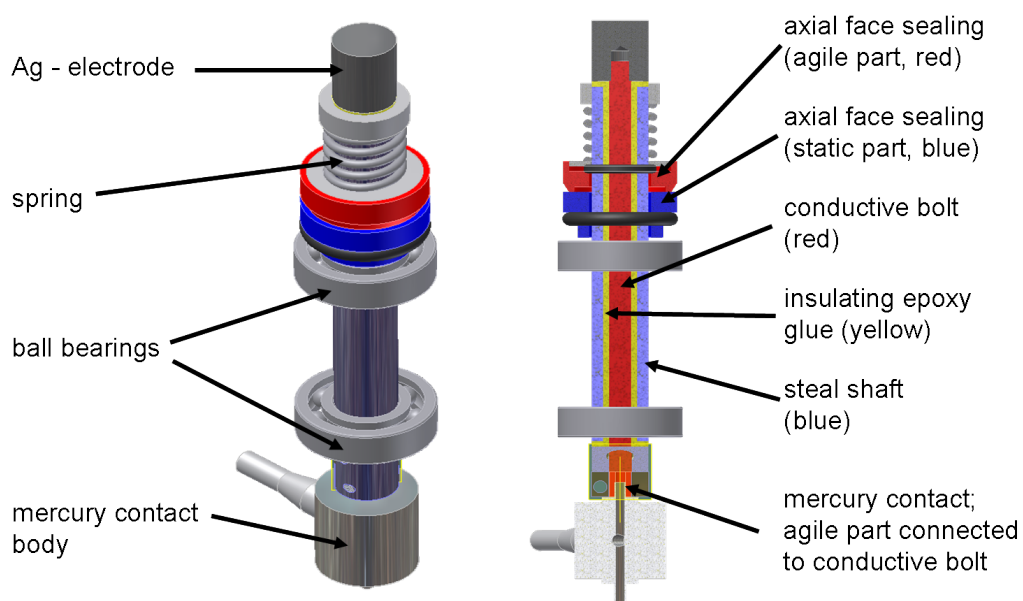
The drive shaft was the most challenging part developing the SERRS measuring cell. Running smoothness is assured by using a rigid stainless steel rod which is embedded into the PMMA cell body by high precision ball bearings. A conductive bolt is concentrically mounted by an epoxy glue having good insulating properties. The static part of the face sealing sealed the liquid reservoir against the cell body by an o-ring. The agile part was pressed against it by means of a spring. The Ag electrode was screwed on top while on the bottom the conductive bolt was connected to the agile part of the mercury contact, thus providing electric contact between the silver electrode and the potentiostat.
